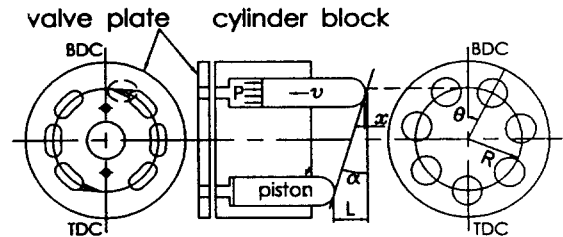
(b) Geometrical configuration of a swash plate type axial piston pump
